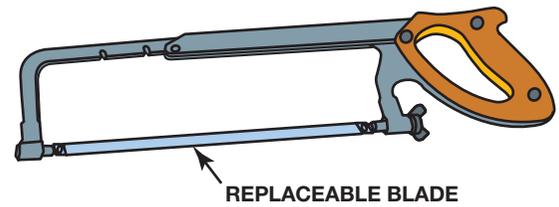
A typical hacksaw that is used to cut metal. If cutting sheet metal or thin objects, a blade with more teeth should be used.
